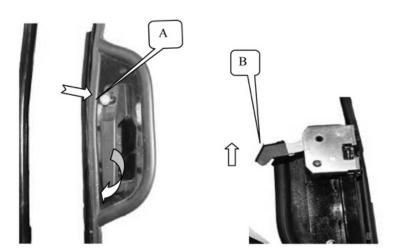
Door handle (Lock outside) Fig. 4-14 Door handle (Lock inside)
